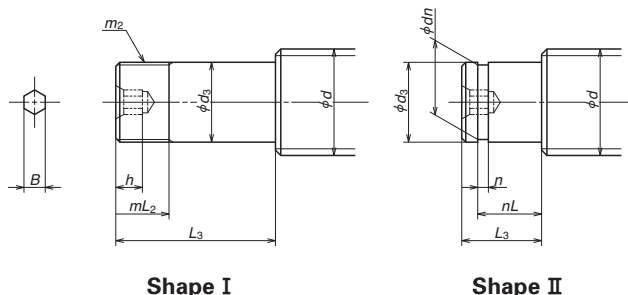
Configuration of standard shaft end (drive side)
